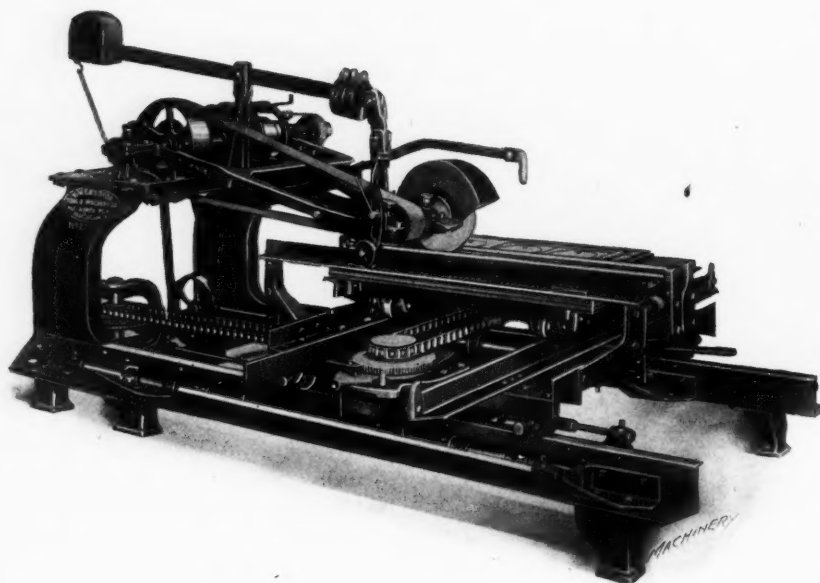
Excelsior Automatic Grinding and Polishing Machine working on Stove Tops
